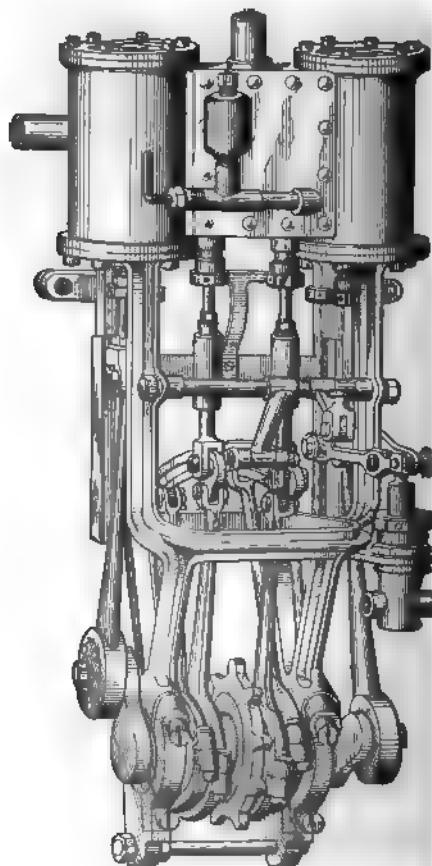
The "Locomobile" Steam Carriage Engine.
